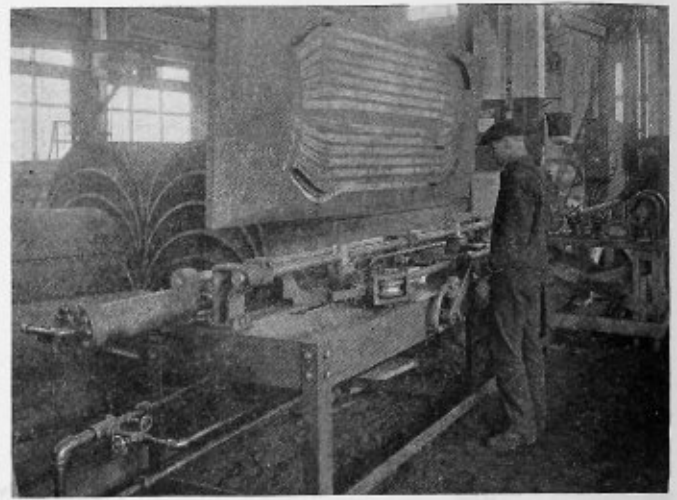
New York Engineering Company Design Hydraulic Tube-Bending Rolls, Shaping Tubes by Template Method
